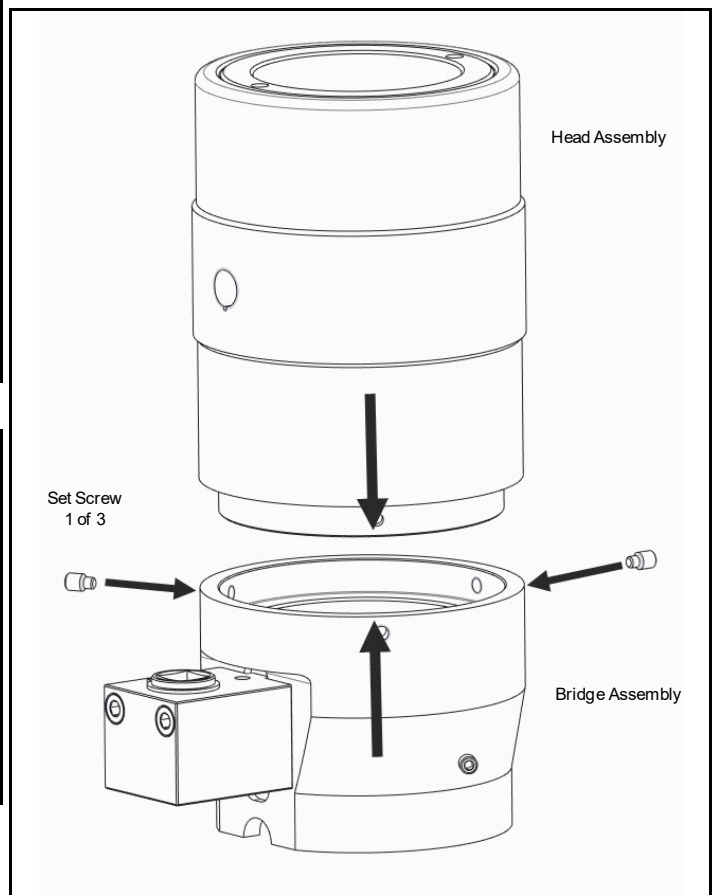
Place head assembly onto bridge assembly, secure with set screws
